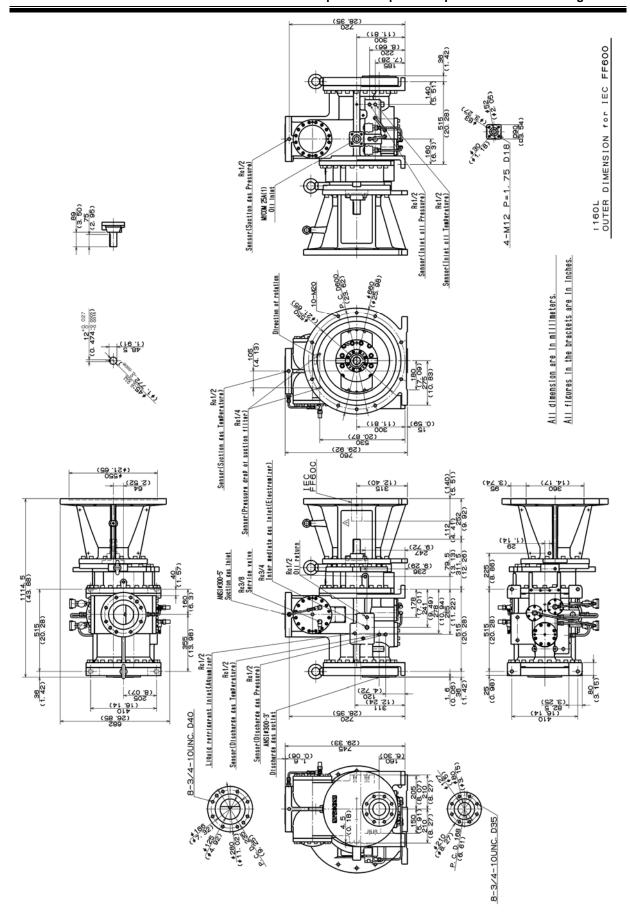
i160L Outer Dimensions with a Spacer for Flange Motor (IEC FF600)
